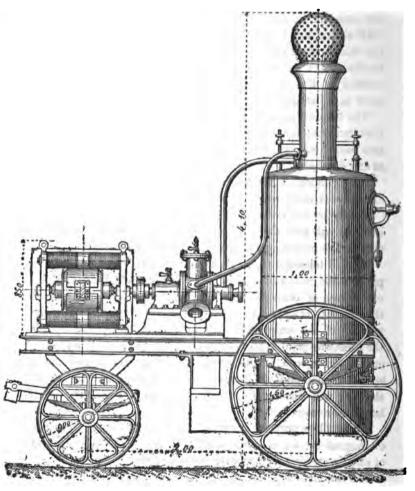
LOCOMOTIVE GRAMME MACHINE.
